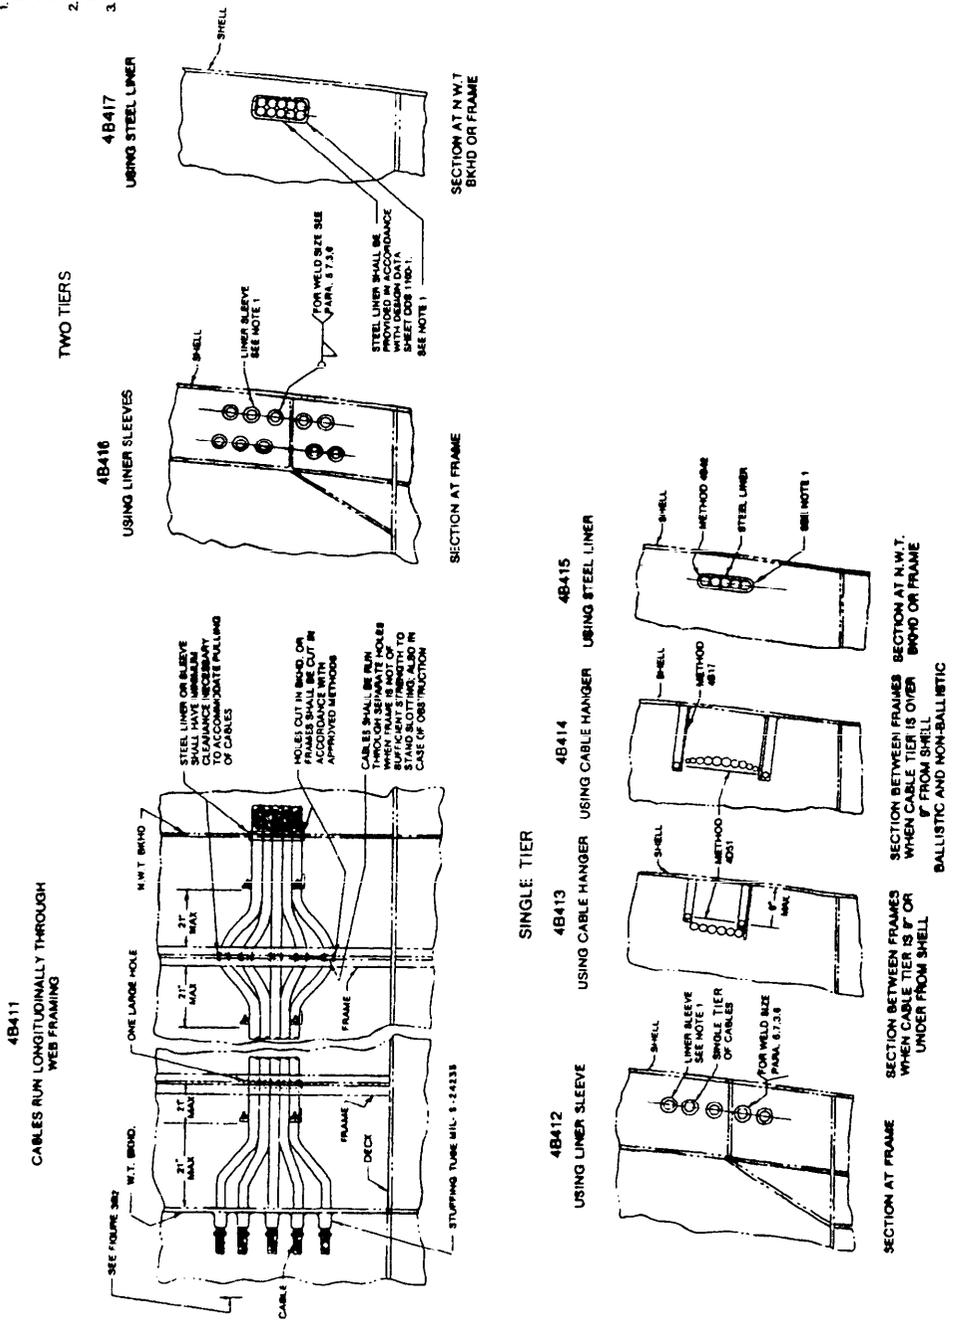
B41. Cable support for degaussing cables (surface ships).
